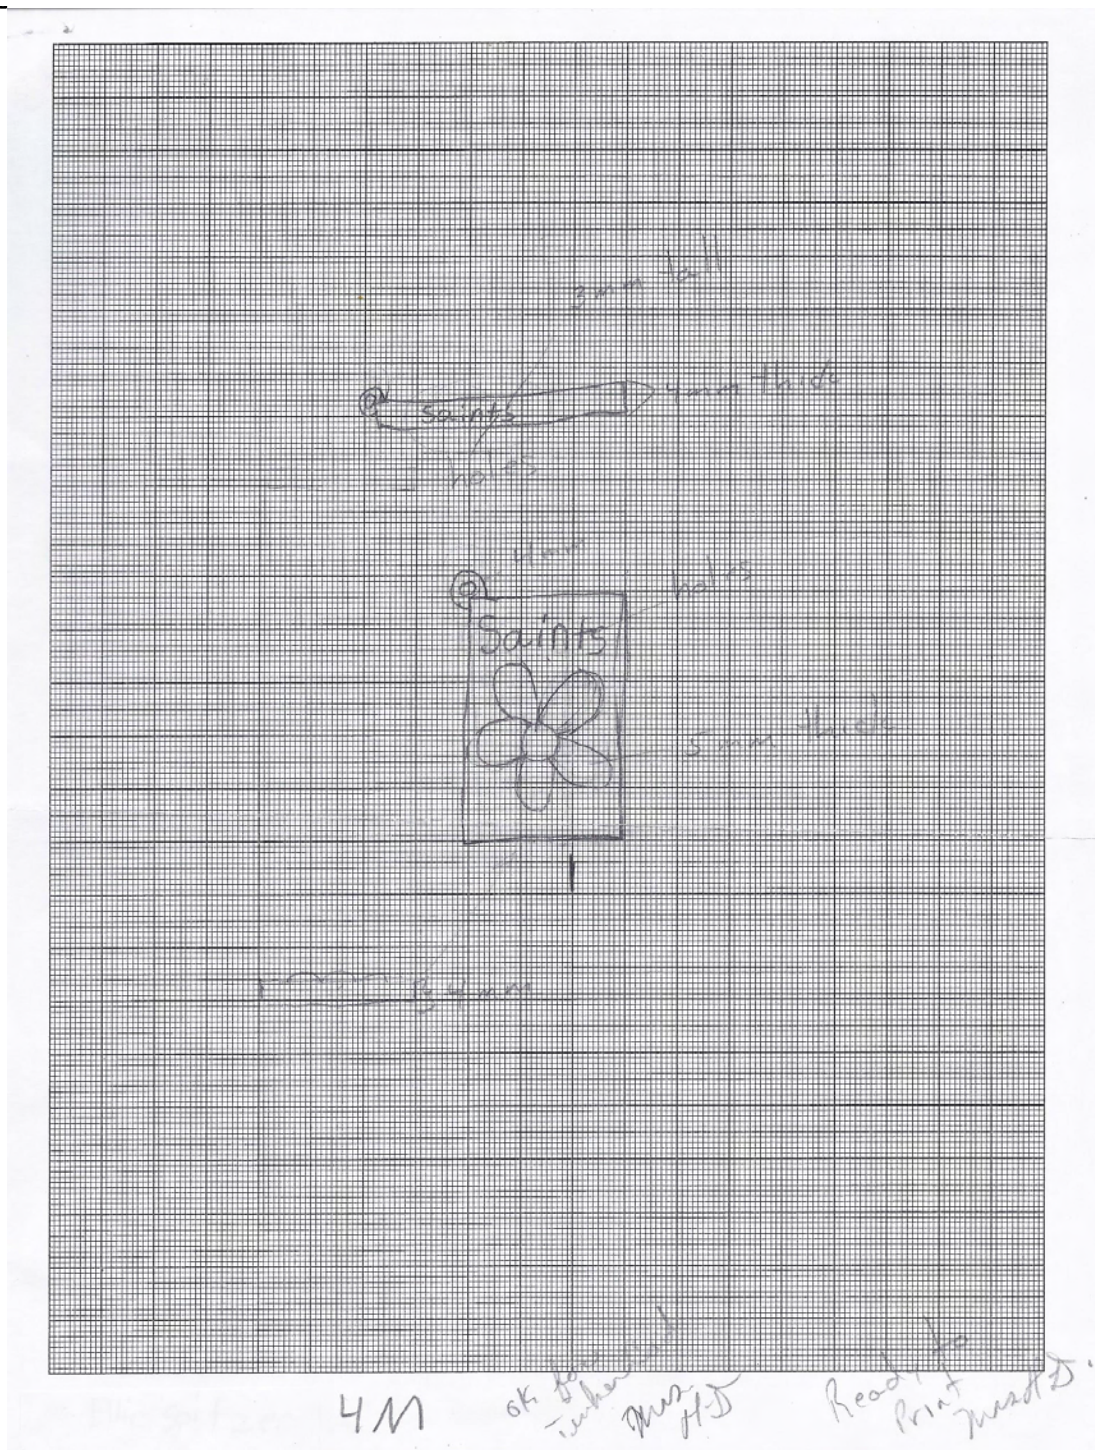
3D Design Planning Stage 2, To-Scale Drawing
